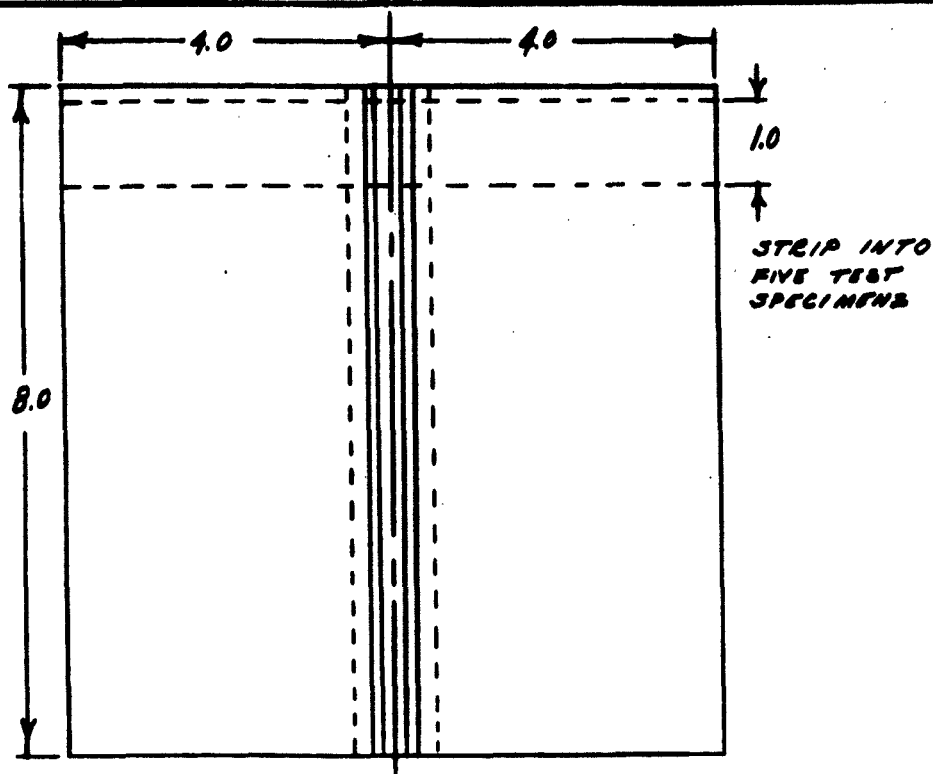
WELD SPECIMENS 2 MADE
